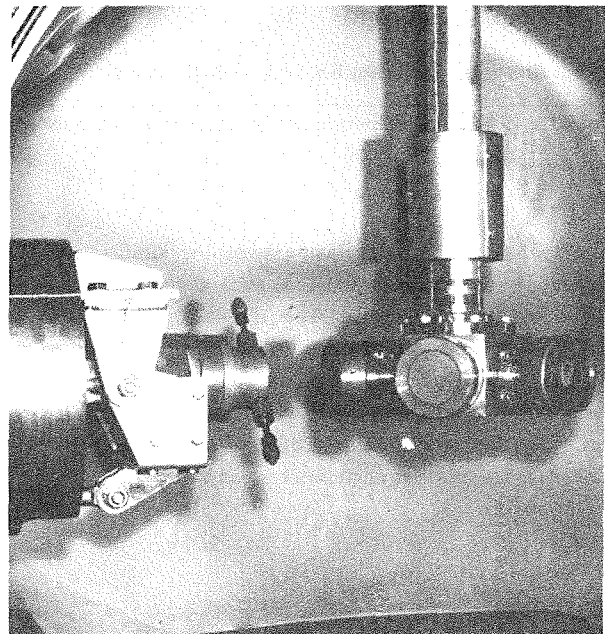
Rotating sample holder carrying six samples and plasma gun
